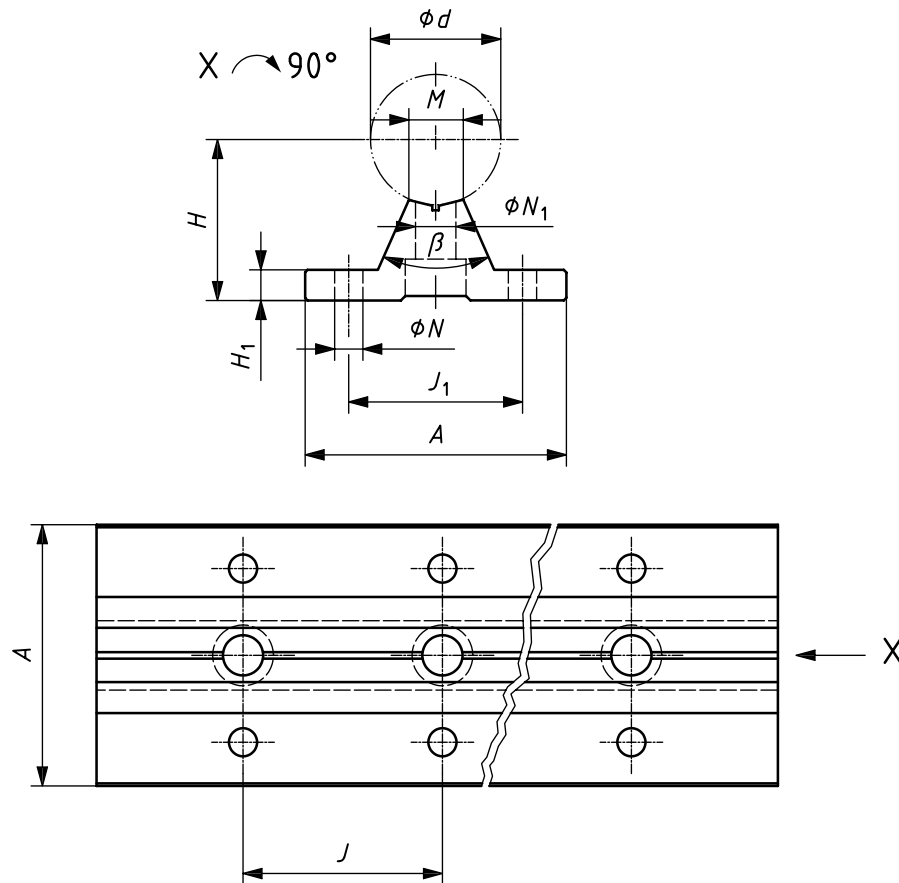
Standard height shaft support rails for series 5 sleeve type linear ball bearings
